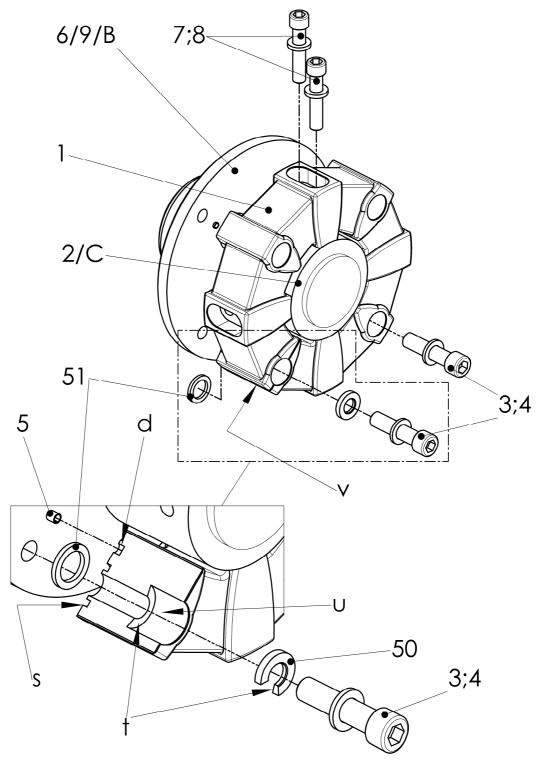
Mounting the rubber element (CF-A-400...600)
